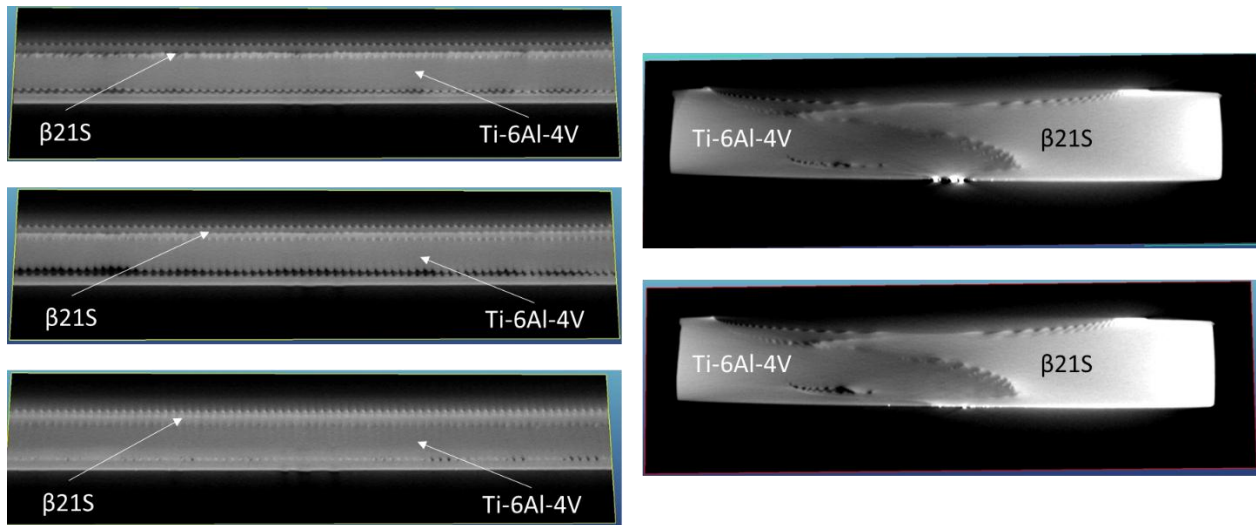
Weld 6 micro CT scans. X-Z (retreating side facing) views on the left, Y-Z (weld travel direction facing) views on the right.
